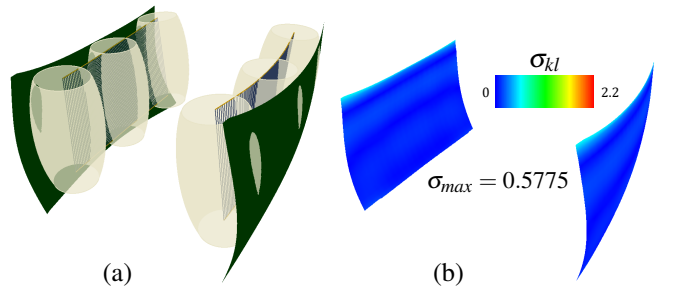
Trochoidal milling with a fixed barrel tool. (a) TR milling with a fixed barrel tool where only the milling path is optimized. The color coding of machining error is shown in (b). While the maximum error is better than for the best conical tool, Fig. 10(b), it is more than six times worse than using a custom-shaped tool, see Fig. 10(d).
